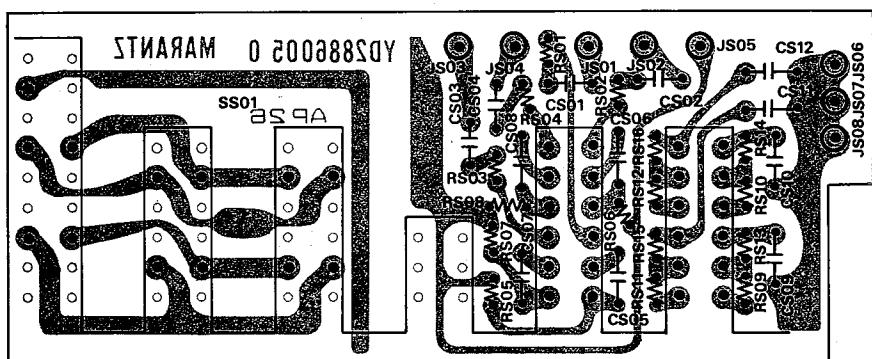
Loudness, Hi Filter, Speaker and Power Switch Unit Assembly PS01 Component Locations
